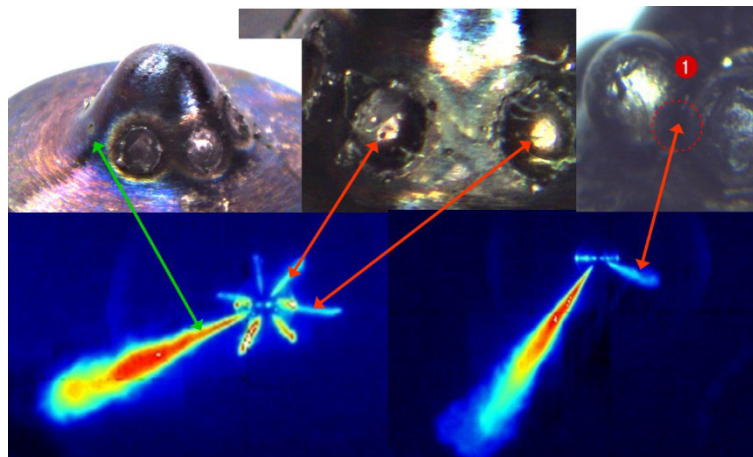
Preparation of injector nozzle for single spray injection by welding of other 6 holes; problems with leaks of welded holes can be noticed
